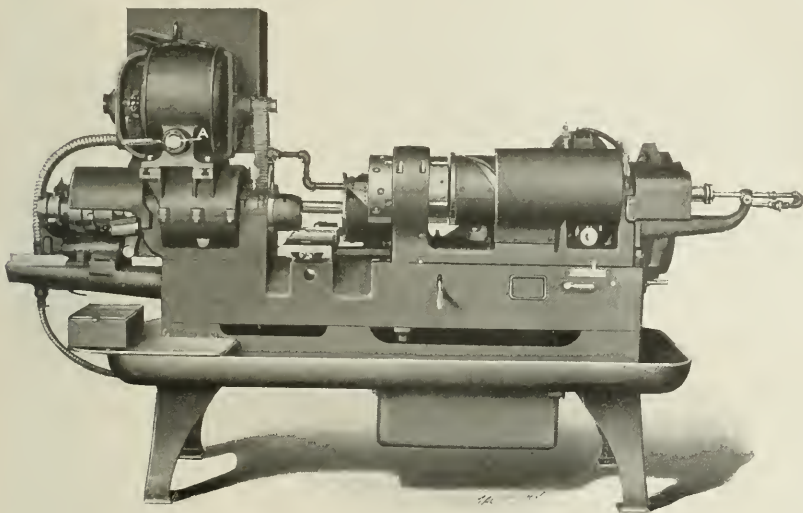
Front View of Cleveland Full Automatic Motor-driven Machine
